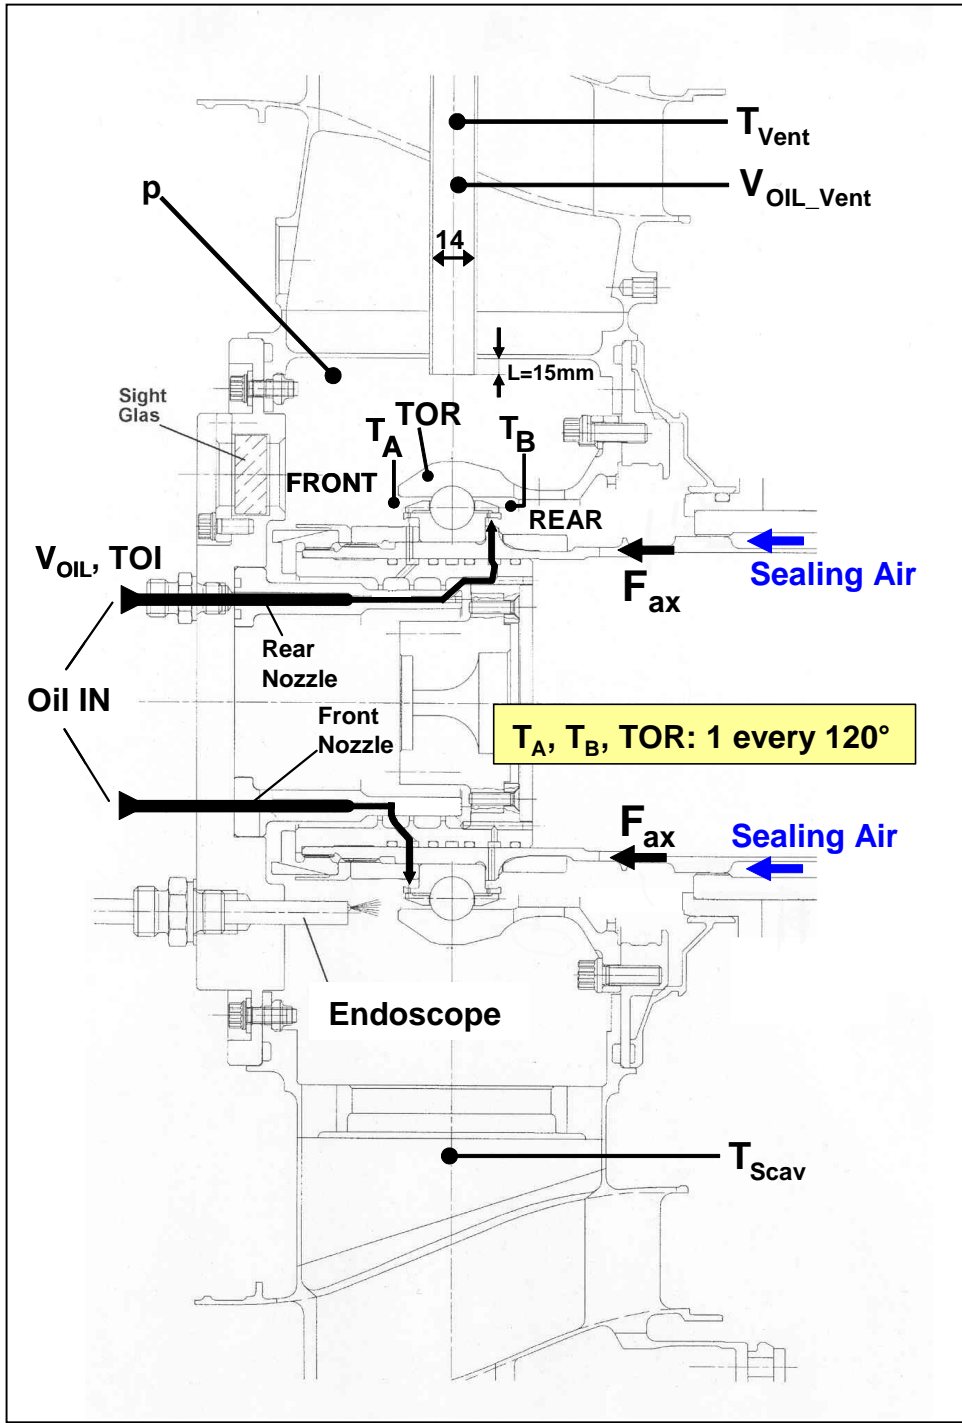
Schematic of the Bearing Chamber and the Ball Bearing
